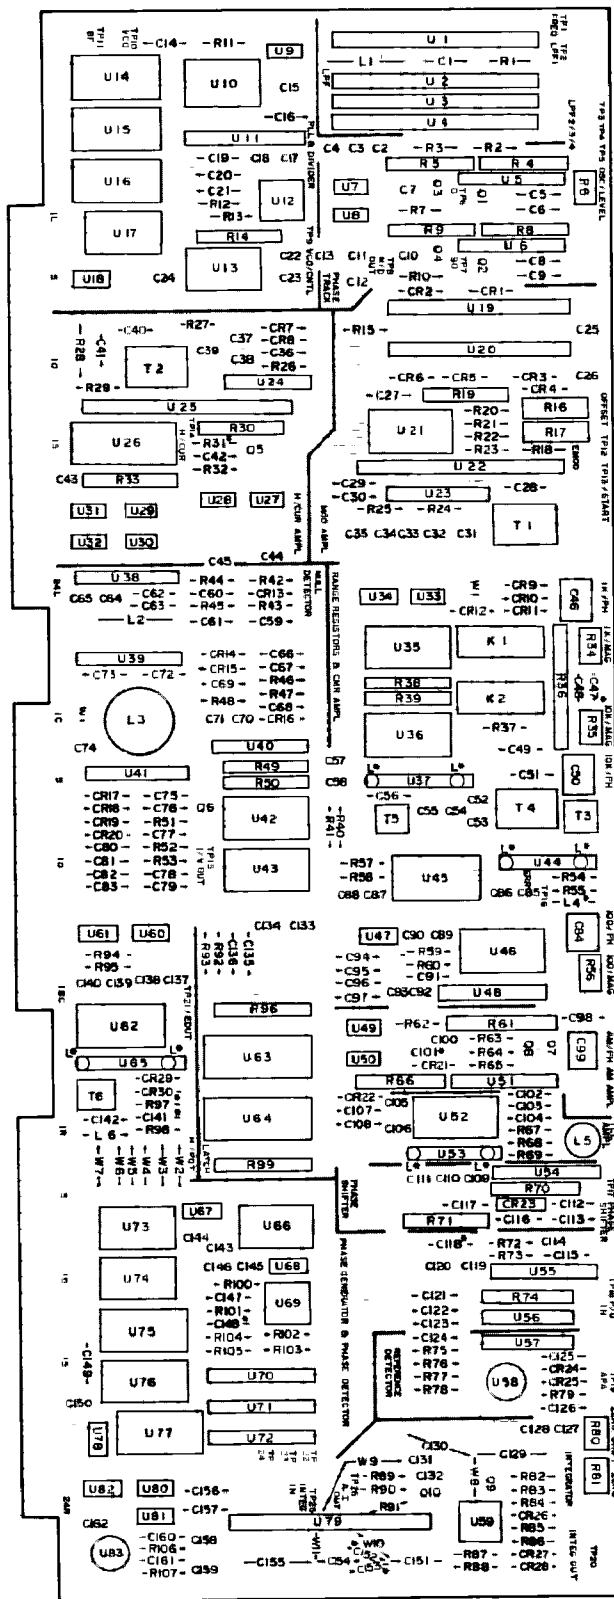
A2 ANALOG Board Assembly Component Locations.
